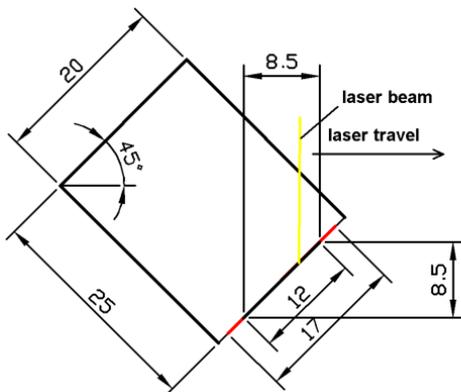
Scheme of sleeve set-up in relation to the laser beam Fig. 2. Exemplary geometric dimensions of the path (micro-segment)
